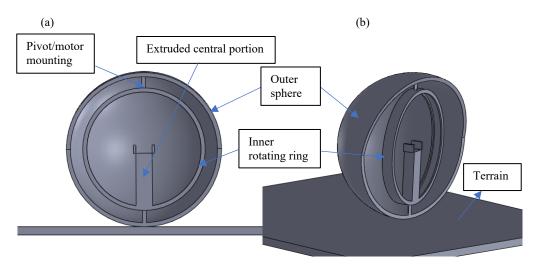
(a) Section view of rotating ring. (b)Isometric view of sectional rotating ring.
